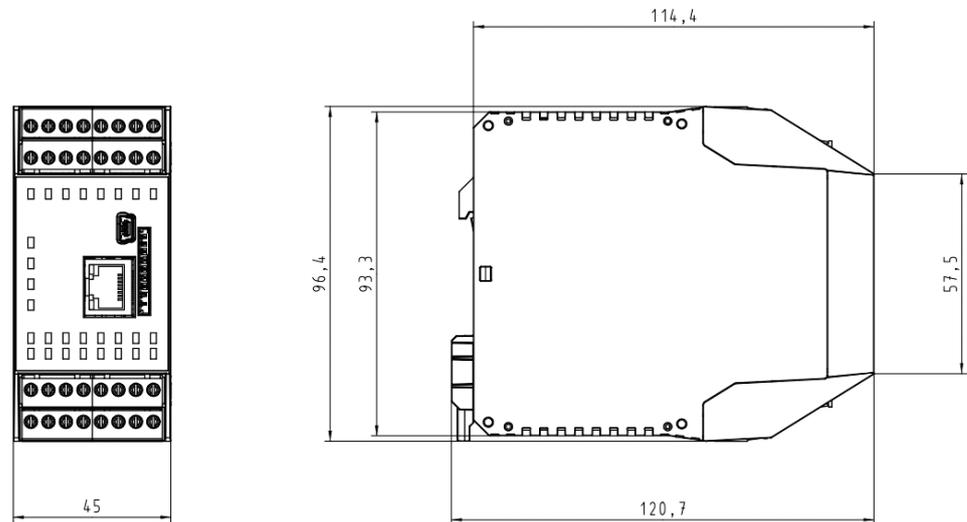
SP-COP1 / SP-COP2 dimensions (mm)
